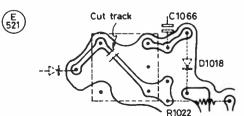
PC and component layout (Old style) near T1010 RF input tuned circuit showing cut track in pcb.
